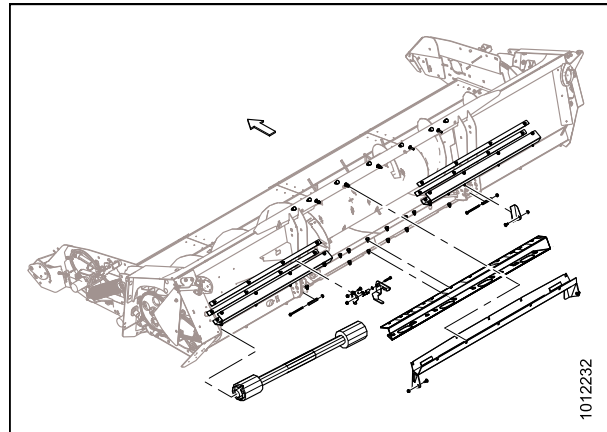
Combine Completion Package Kit – Case IH and New Holland
